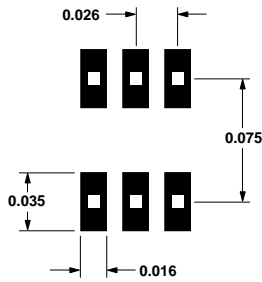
PCB Pad Layout for INA-32063 (dimensions in inches).
